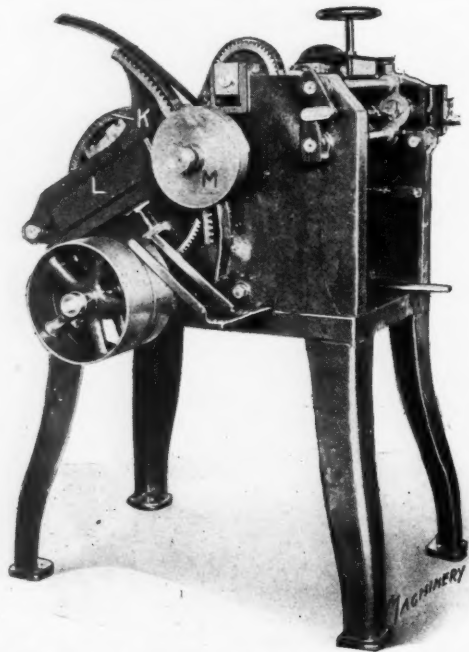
Mechanism of Sleeper & Hartley Spring Coiler that controls Length of Spring
